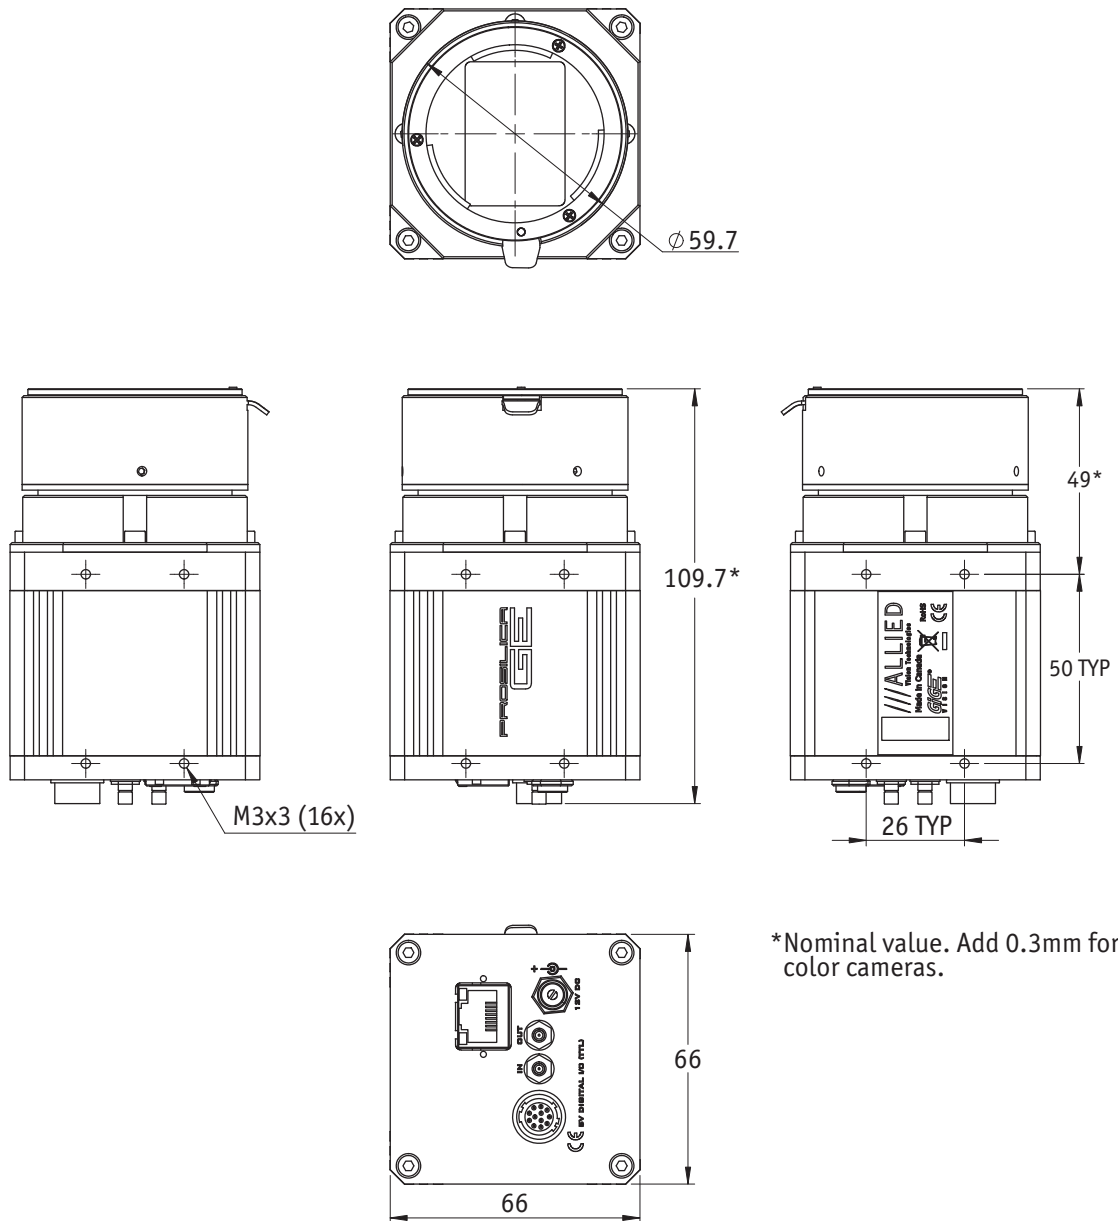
Prosilica GE large format F-Mount mechanical dimensions
